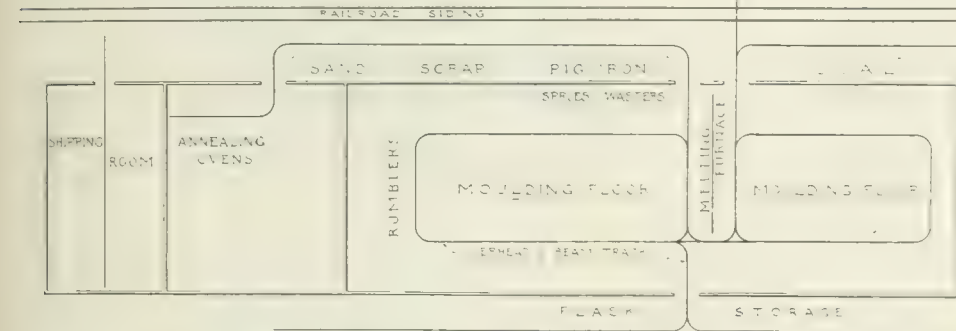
Plan Showing the Track Layout for the I-Beam Trolley System at the Foundry of the Torrance Malleable Iron Company, Troy, N. Y.
